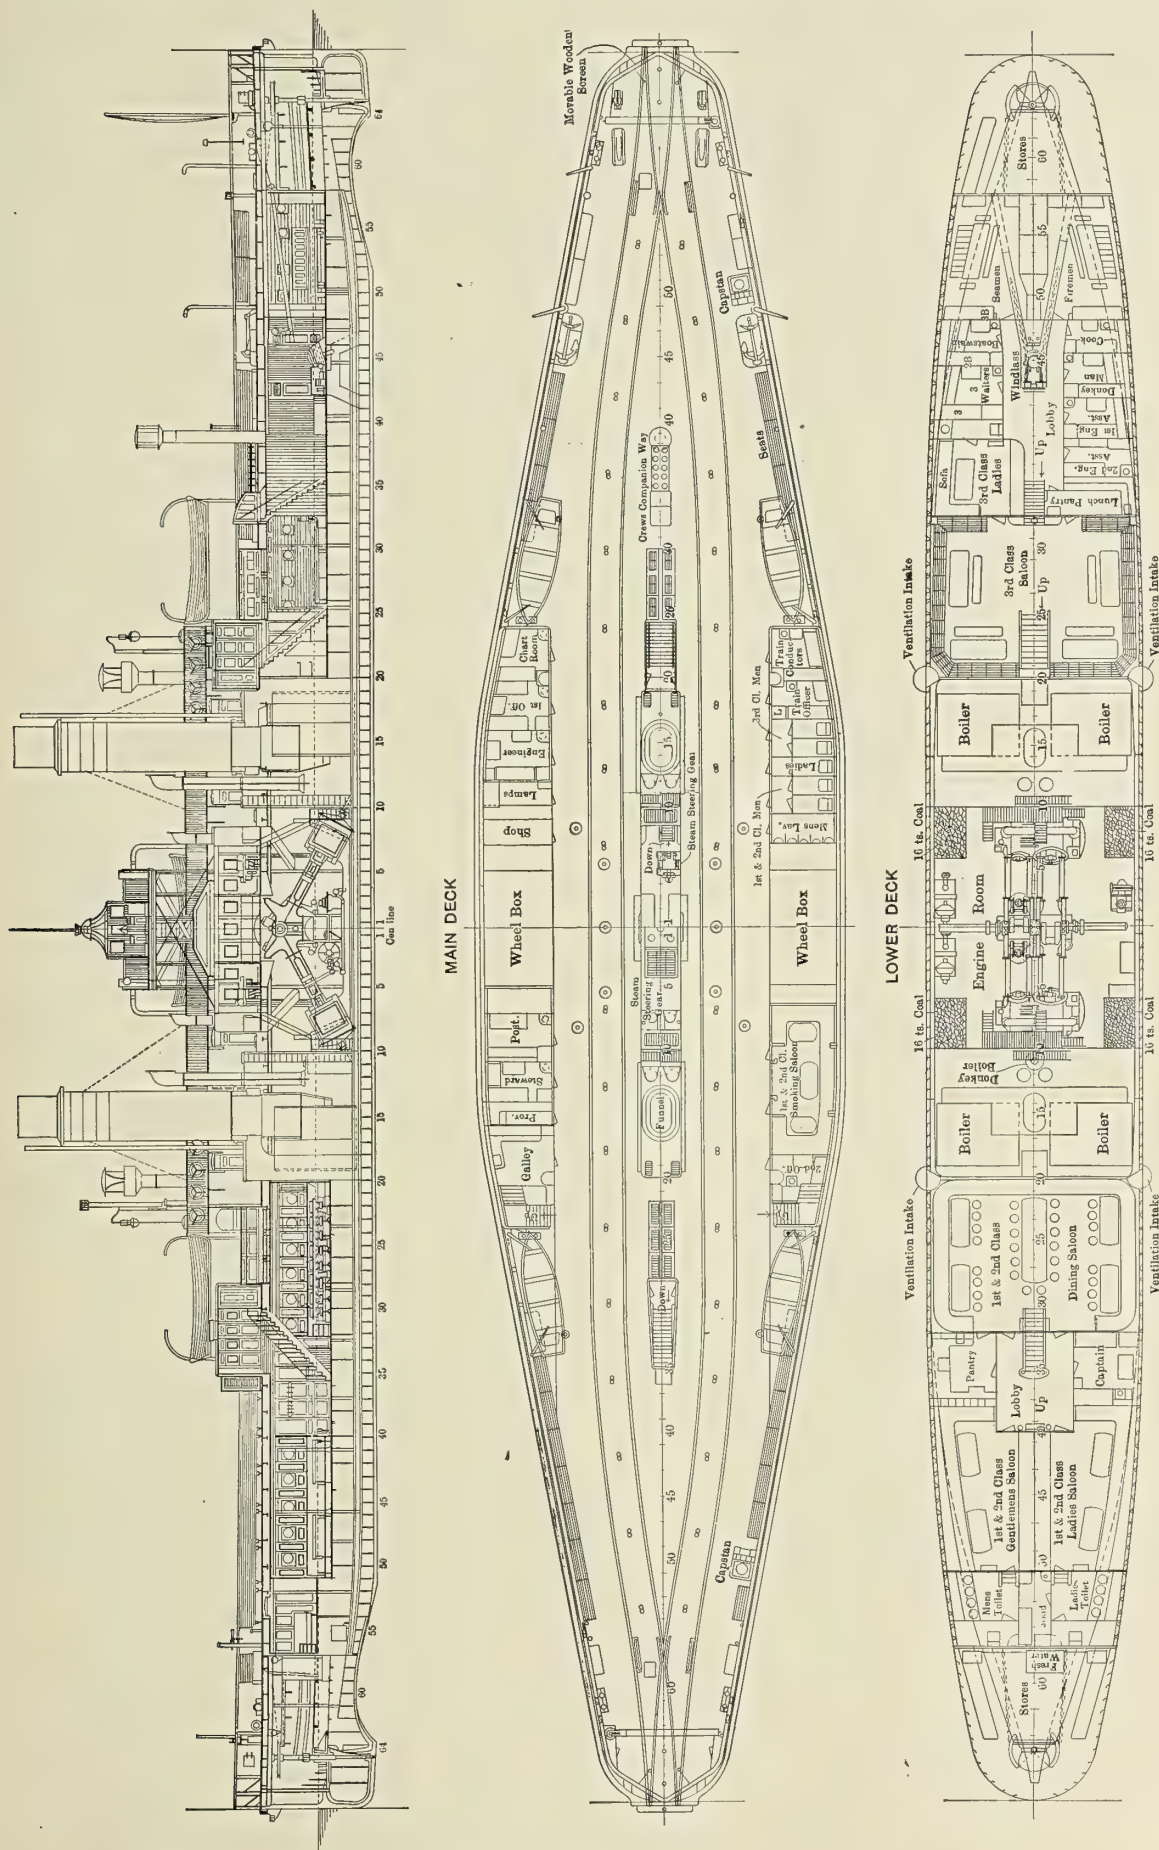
PROFILE AND DECK PLANS OF FIDDLE-WHEEL FERRY KJOEBENHAVN.
